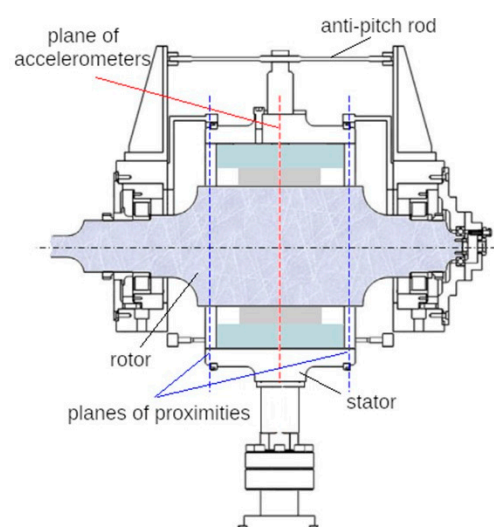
Section of the test apparatus on a plane containing the bearing axis.
